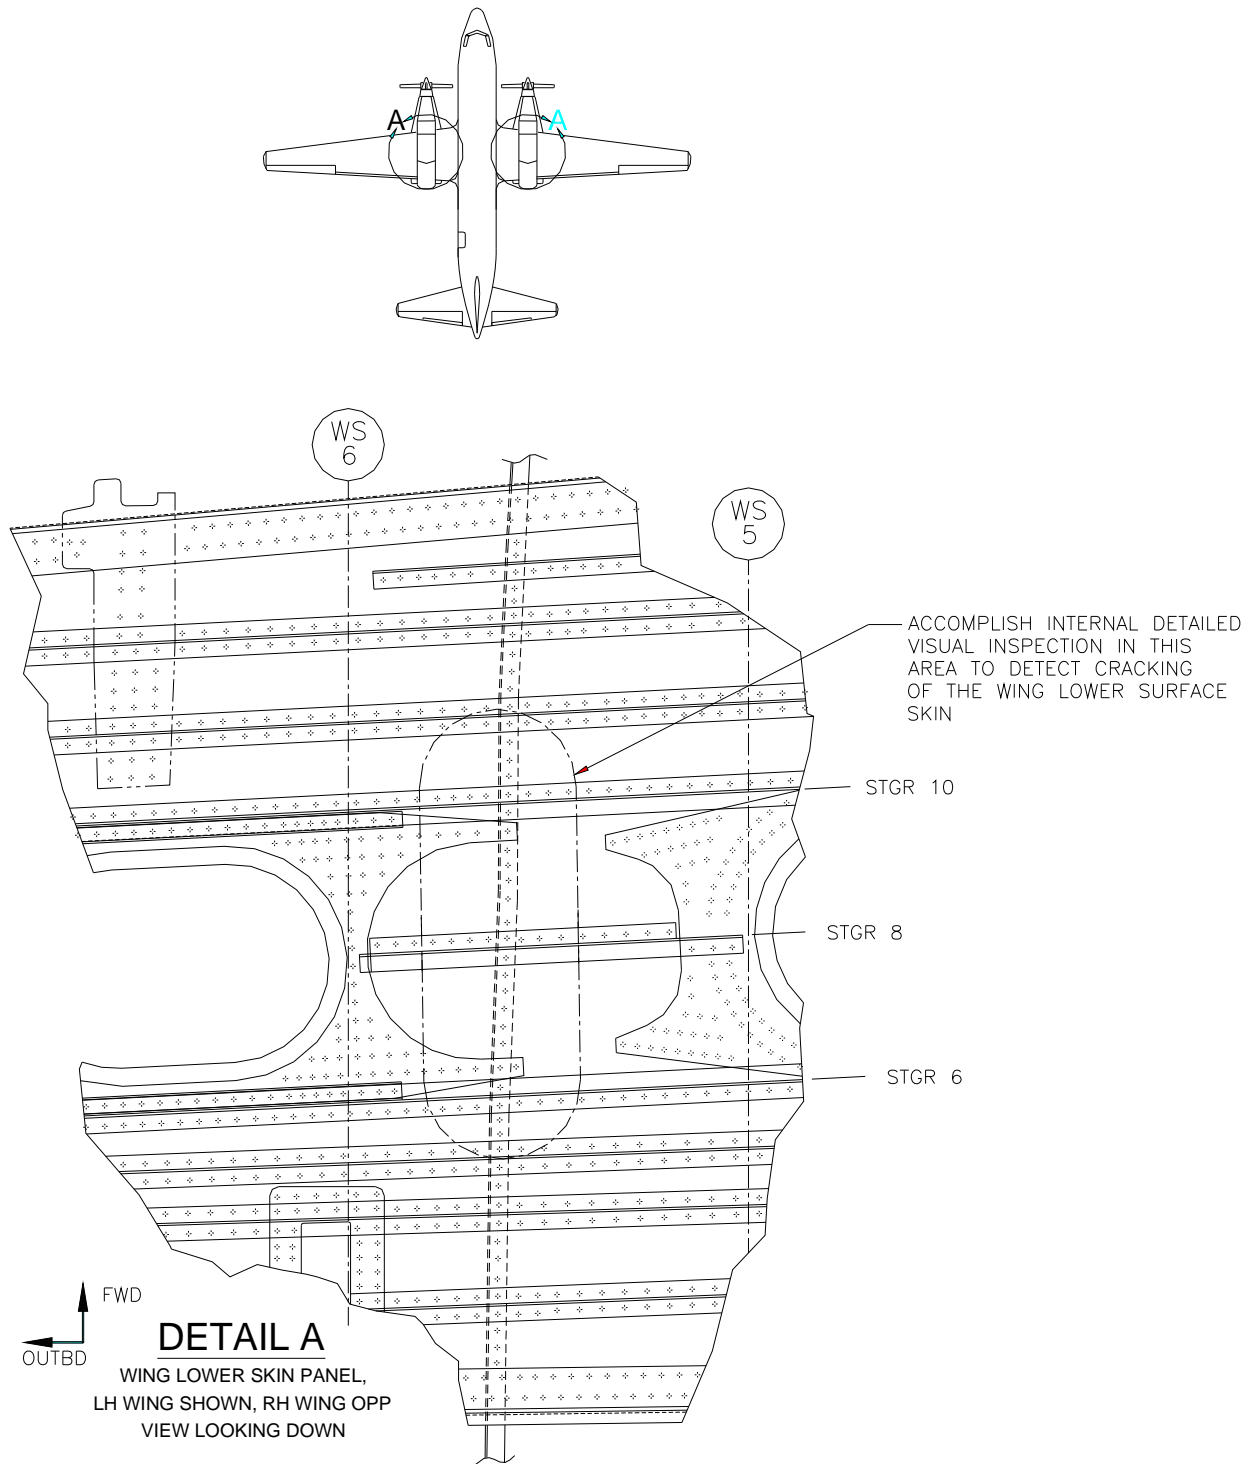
Inspection of Wing Lower Surface Skin Between WS 5 and WS 6
